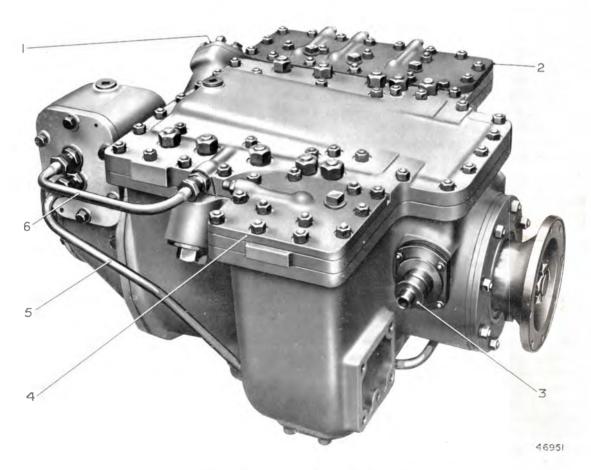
VIEW OF THE GEARBOX SHOWING BOTTOM COVER
